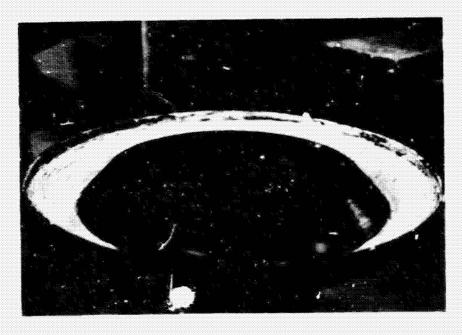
Cured Penetration Panel Tool With Plaster Mold Partially Removed
